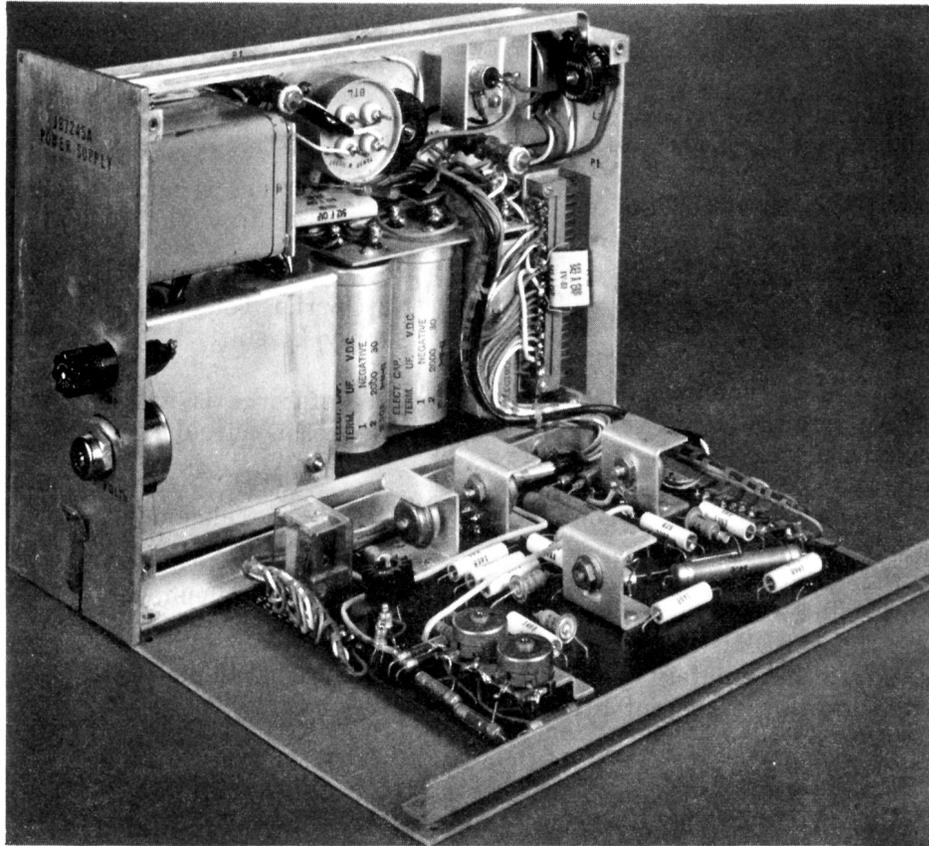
J87245A Power Supply Unit — Partially Disassembled
